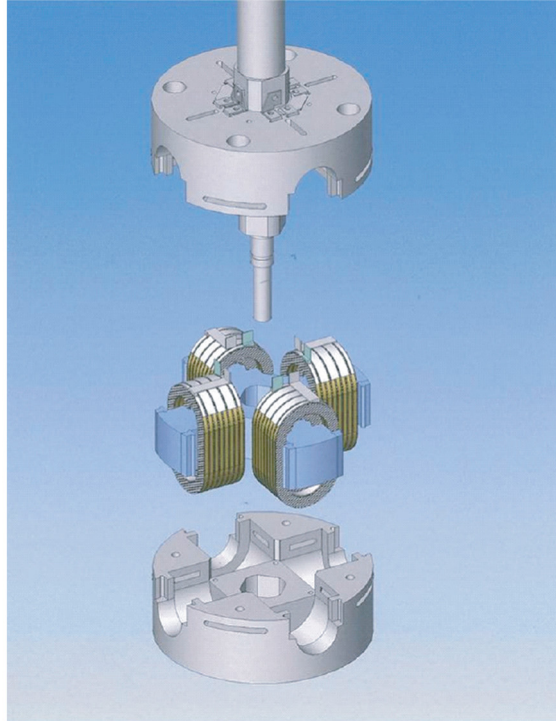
Exploded drawing of the four-pole rotor and the containment parts that restrain it.
